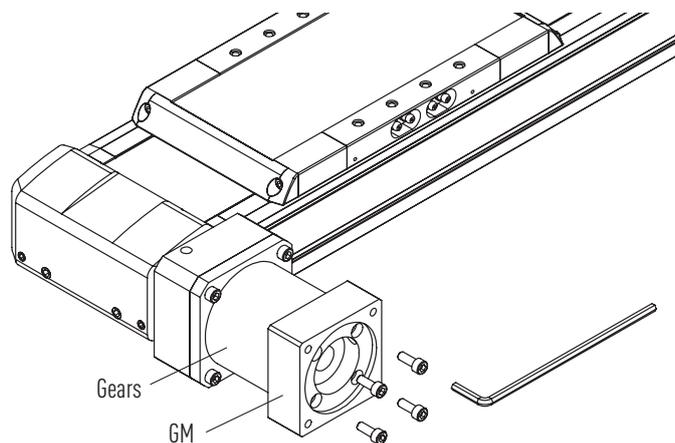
Mounting the motor gear adapter plate GM (HT-B)
